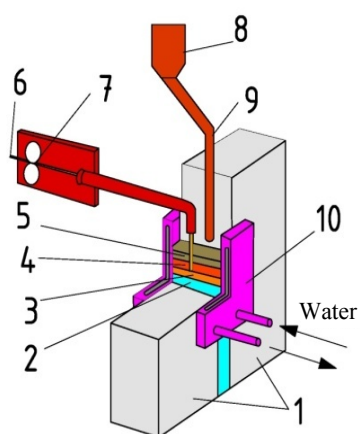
Basic diagram of the welding technique: 1 — parts to be welded; 2 — weld metal; 3 — welding pool; 4 — liquid slag; 5 — flux envelope; 6 — welding wire; 7 — wire feeder; 8 — flux dispenser; 9 — supply of flux to the welding zone; 10 — copper water-coiled dam
